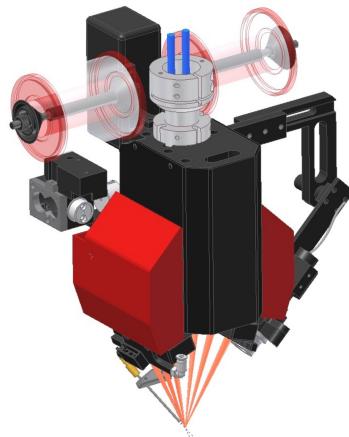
The newly developed laser soldering tool LLW03 with six laser diode sources, double solder wire feed and a laser power of 60W at a wavelength of 940nm. The laser diode sources are cooled by Peltier elements; water cooling is unnecessary. Thanks to the LLW03, the individual laser beams can now be perfectly fine-tuned to the geometry of the joint to be soldered.
